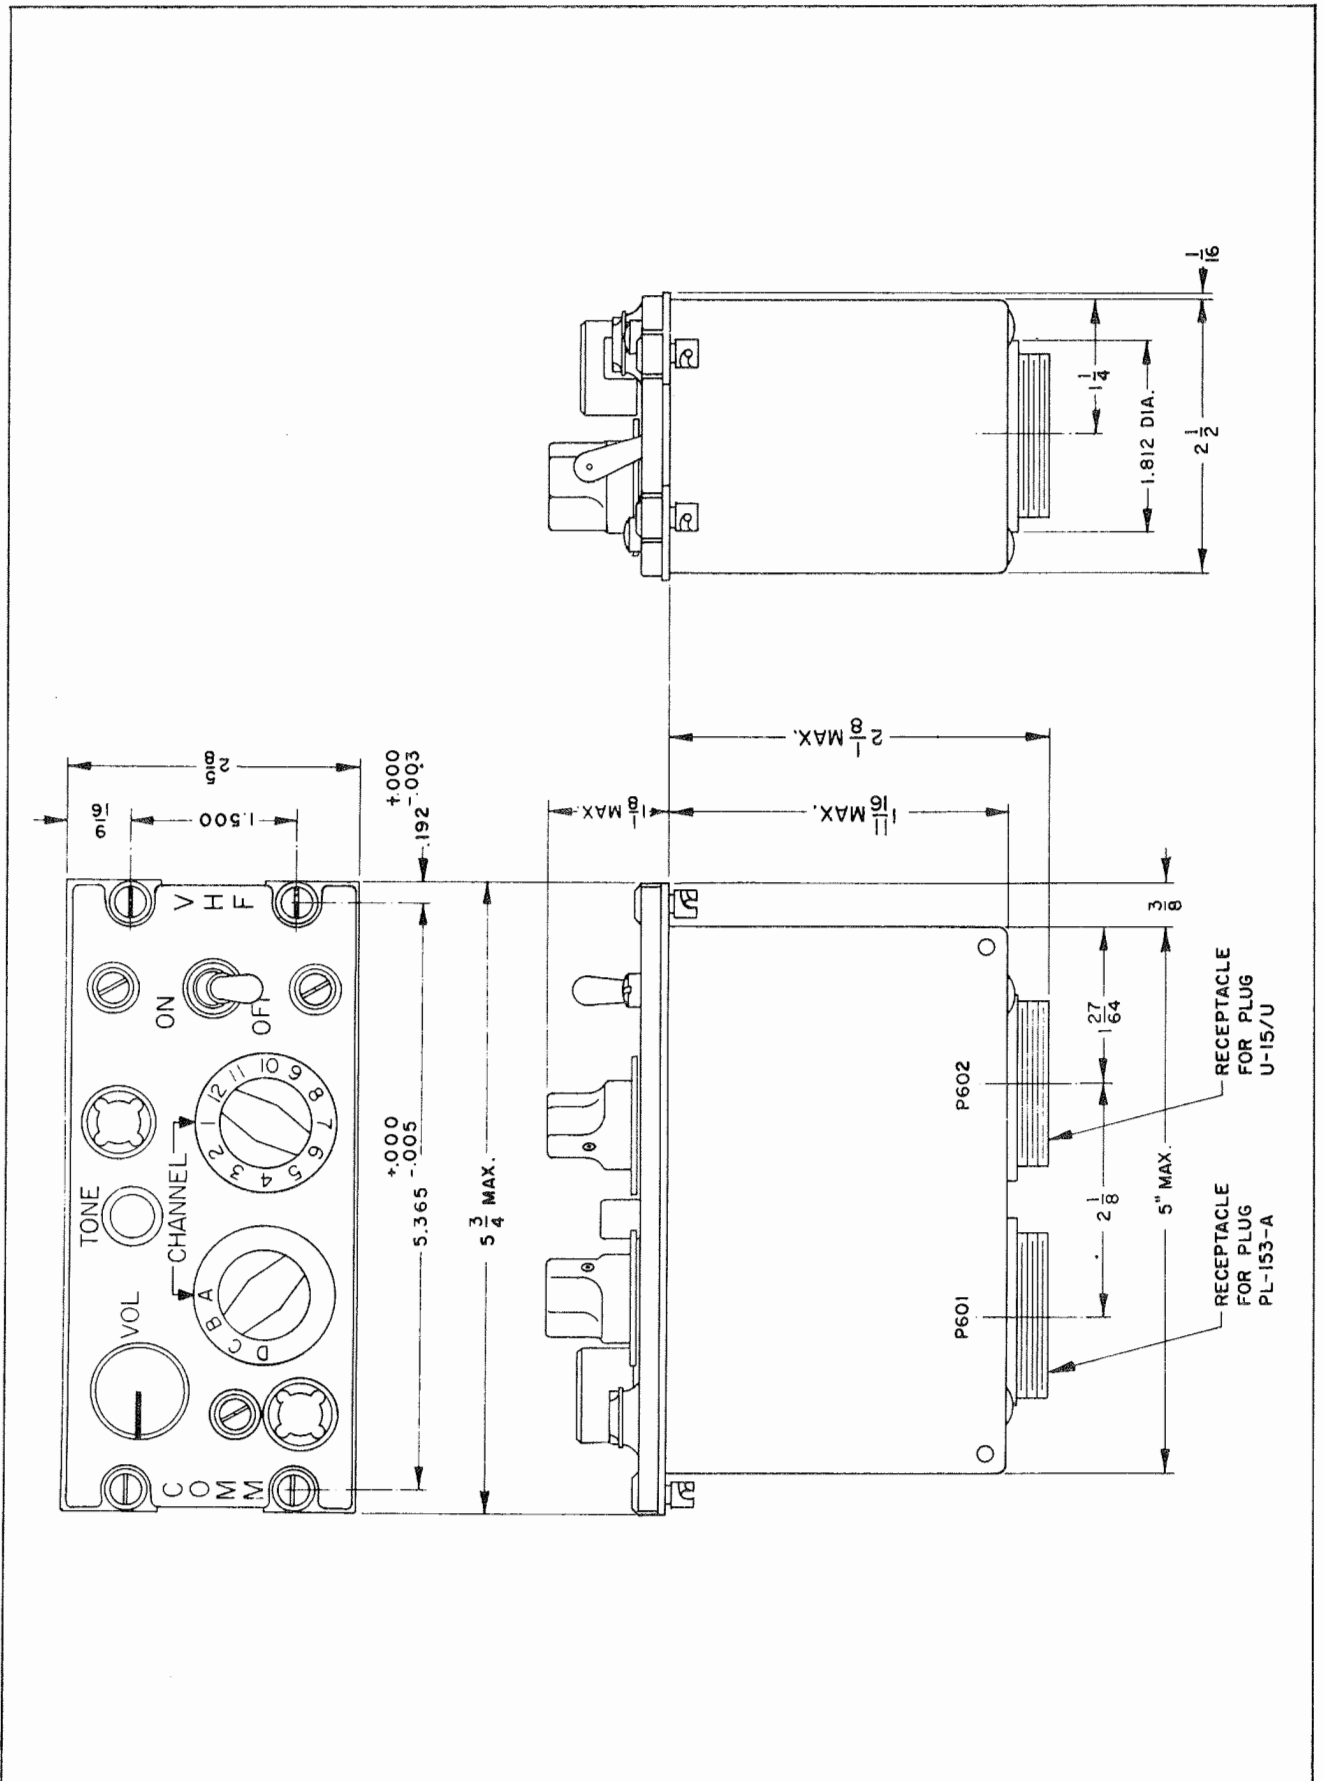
A. Control, Radio Set C-1400A/ARC-49 — Outline Drawings and Dimensions.
